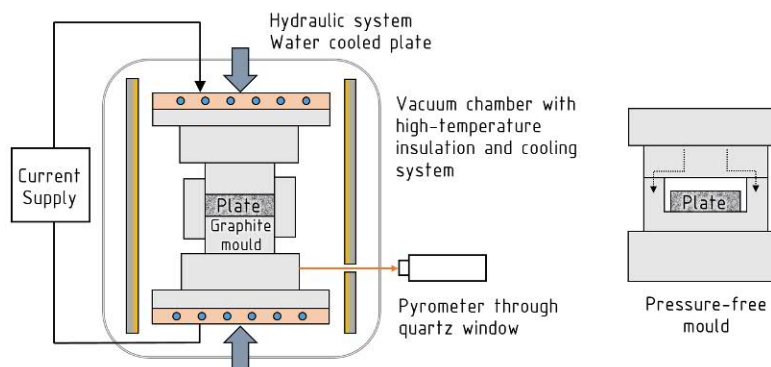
Schematic of the sintering machine used. Once sintered, the pressure-free mould is used for the post-sintering cycle
